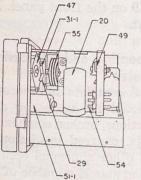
Parts identification, top and end view of receiver, Radio Receiver and Transmitter BC-1306.
